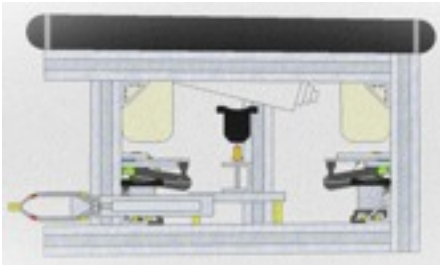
CAD Mechanical drawing of Kaikoa's frame.
